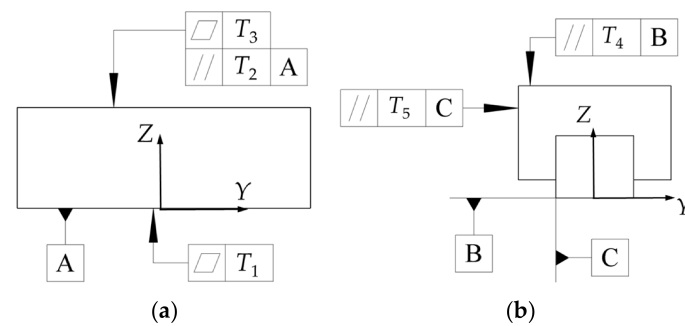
Key component design tolerances of linear axis: (a) base; (b) guideway–slider system.
